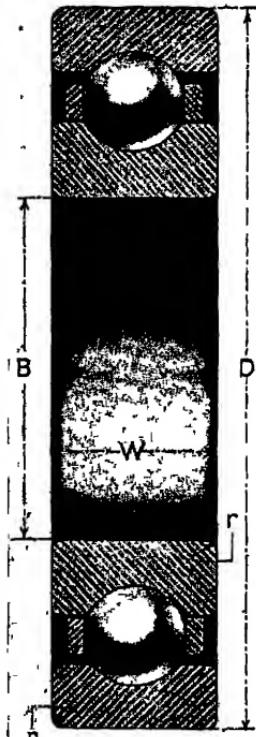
THE HOFFMANN SINGLE ROW JOURNAL BEARING
